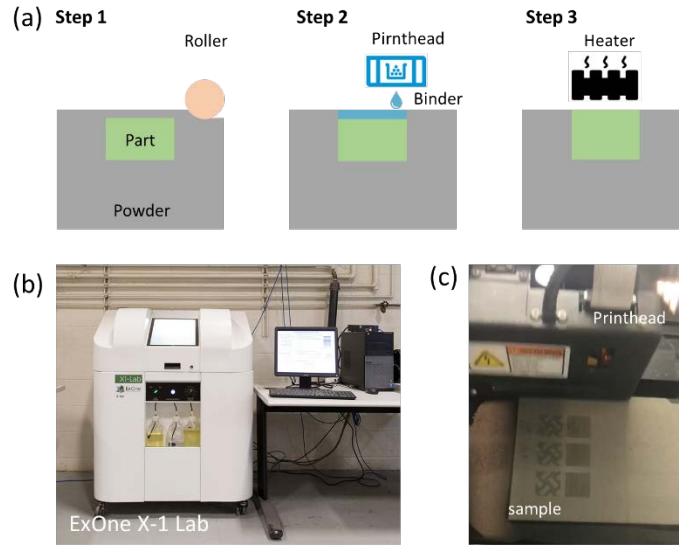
Binder jetting 3D printing. (a) Schematic of binder jetting 3D printing process, (b) Photo of binder jetting 3D printing machine, (c) Photo of 3D printing process.
